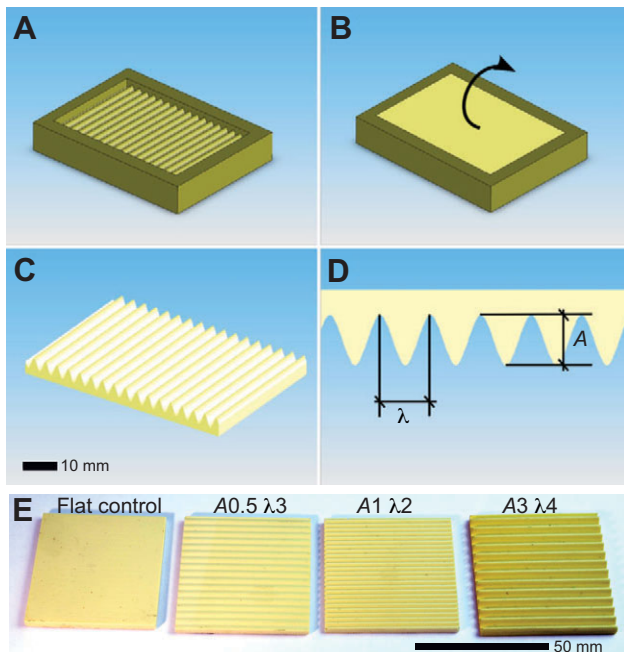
Creation of the surfaces. (A) A 3D wax mold was printed. (B) Polyurethane (PU) was then cast into the mold and allowed to cure. (C) The PU surface was then removed from the mold. (D) Cross-section of the surface showing amplitude A and wavelength λ . (E) The flat PU control surface as well as three example surfaces used in the various conditions.
